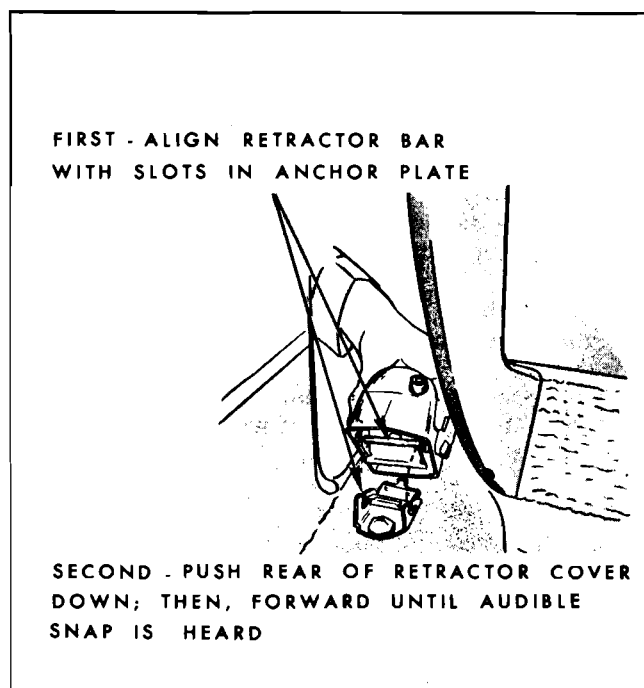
Front Seat Belt Self-Locking Retractor - Installation
